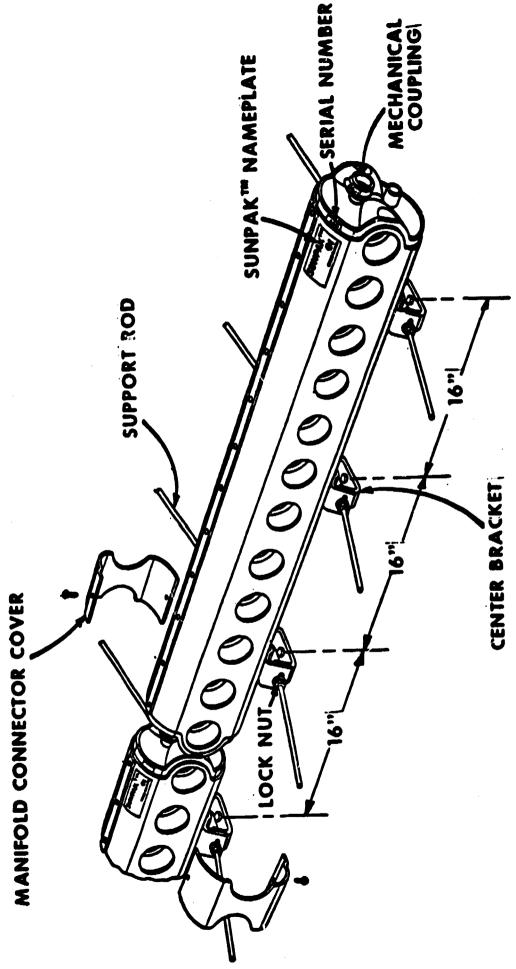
Manifold Assembly. (Courtesy Owens-Illinois)
